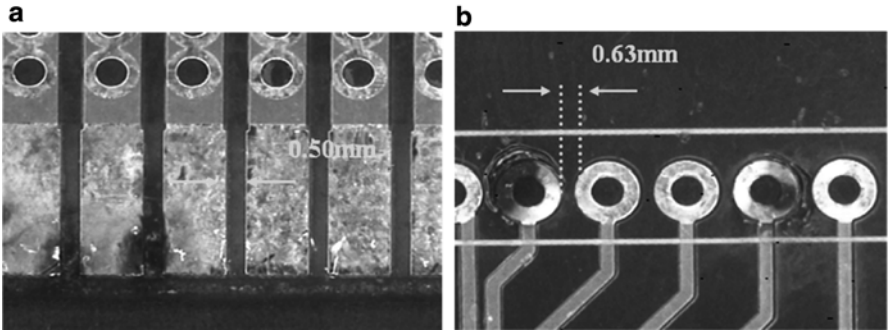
The PCB FR4 with and without the solder resist. (a) FR4 coated with solder resist, (b) FR4 not coated with solder resist
